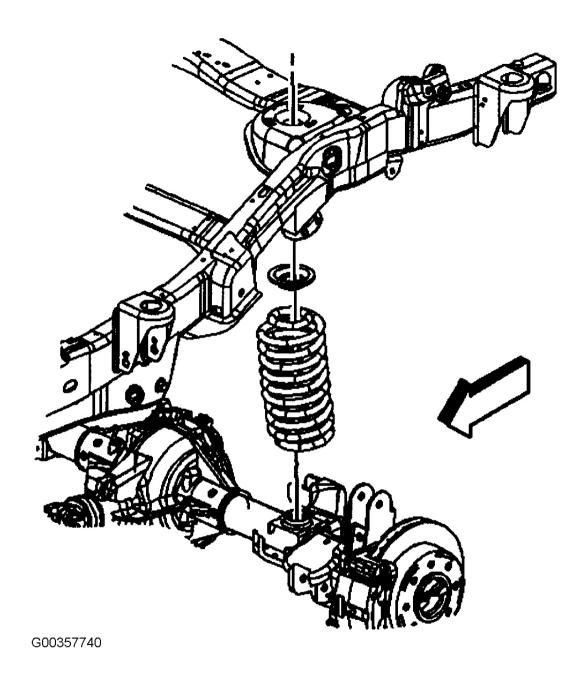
Removing Rear Coil Spring Courtesy of GENERAL MOTORS CORP.
